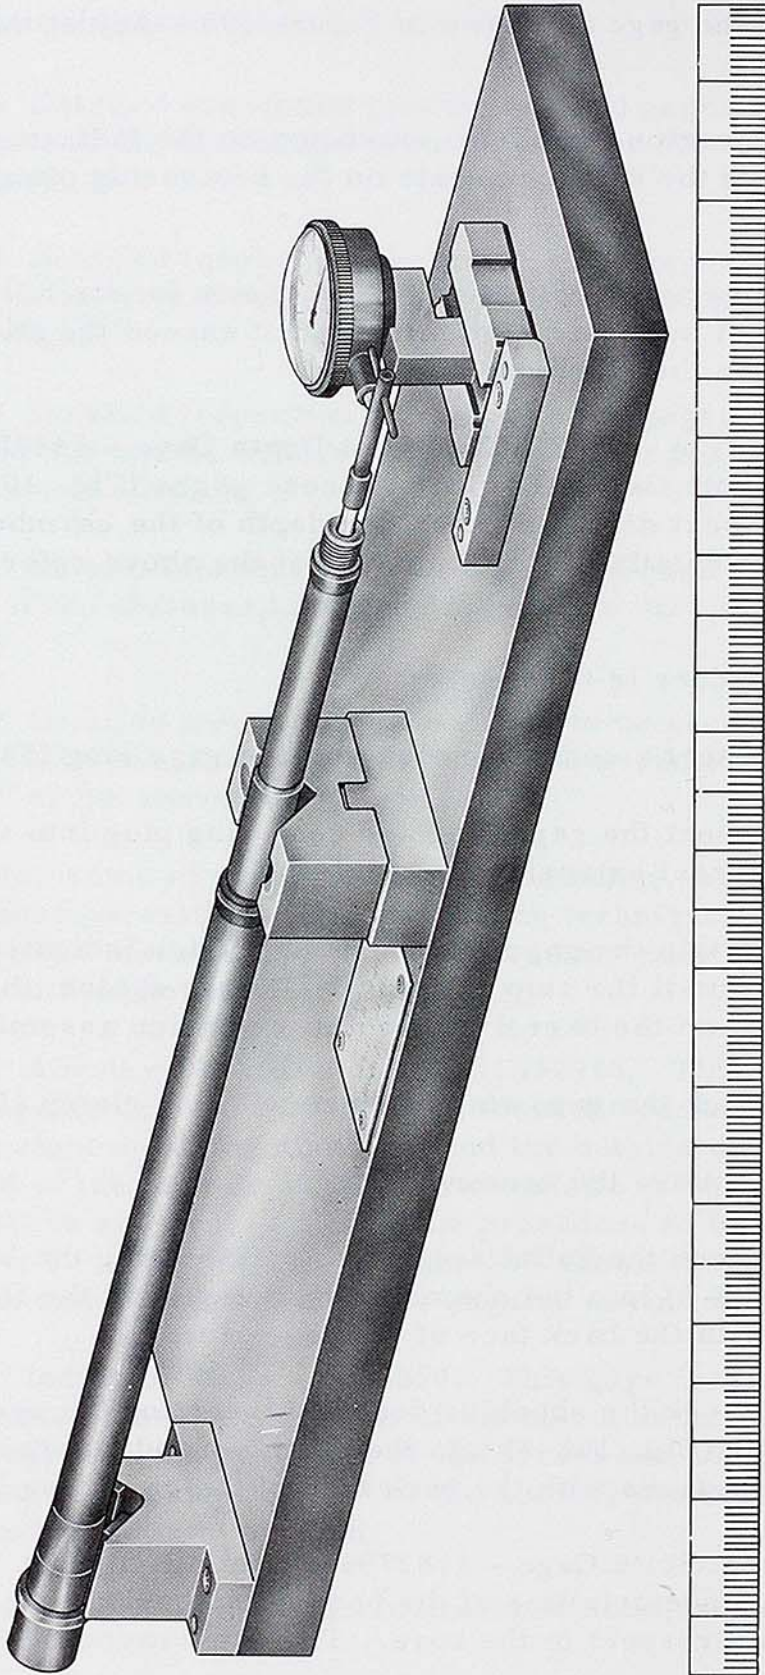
Barrel and Barrel Extension Assembly Positioned in Angular Deviation Gage.
